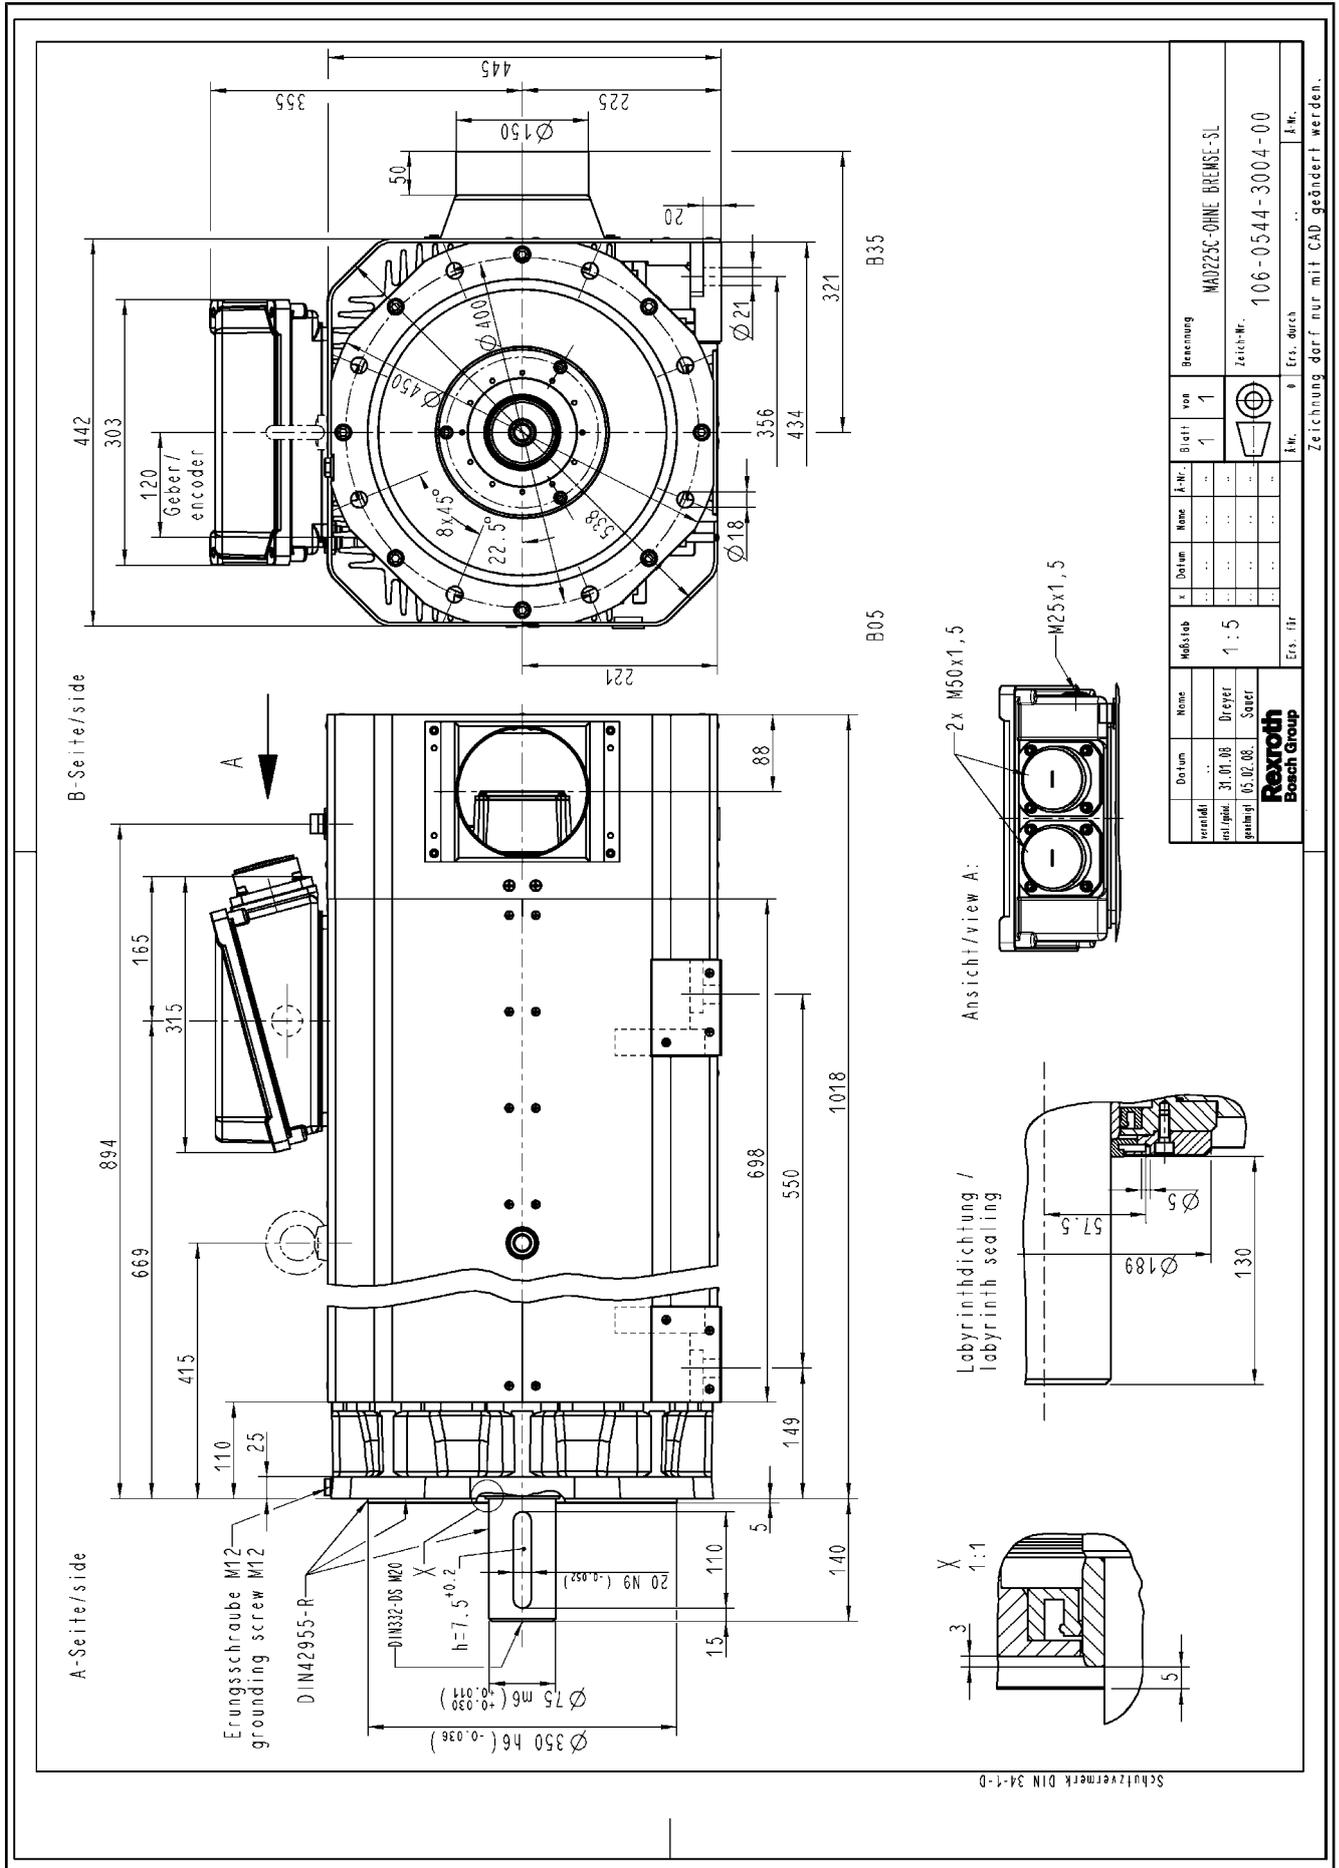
MAD225 with SL cooling, without brake (terminal box rotatable)
